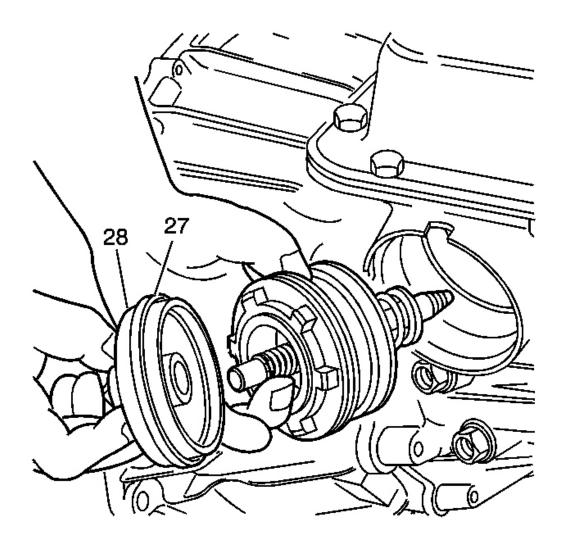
View Of 2-4 Servo Assembly Courtesy of GENERAL MOTORS CORP.
